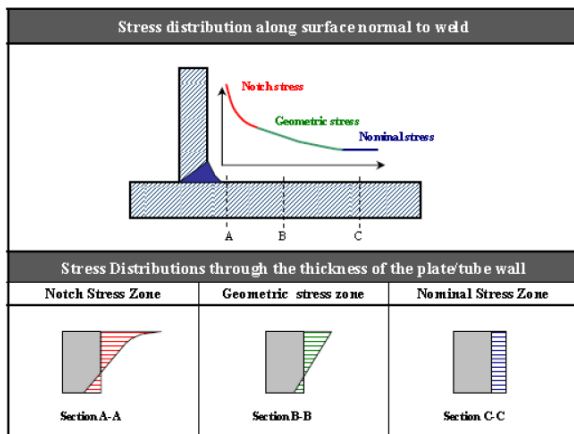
Stress state in the fillet weld toe region of a welded joint
